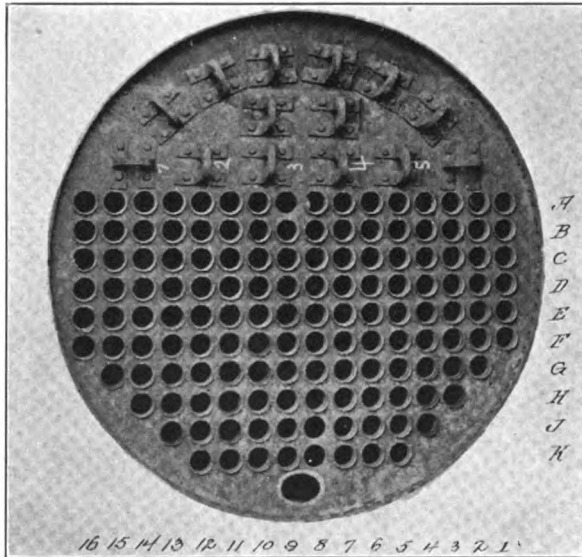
INSIDE OF REAR HEAD, BOILER NO. 4084, AFTER 295 LB. PRESSURE. LETTERS AND FIGURES REFER TO MARKS SHOWING LOCATION OF TUBES IN SUBSEQUENT PHOTOGRAPHS
